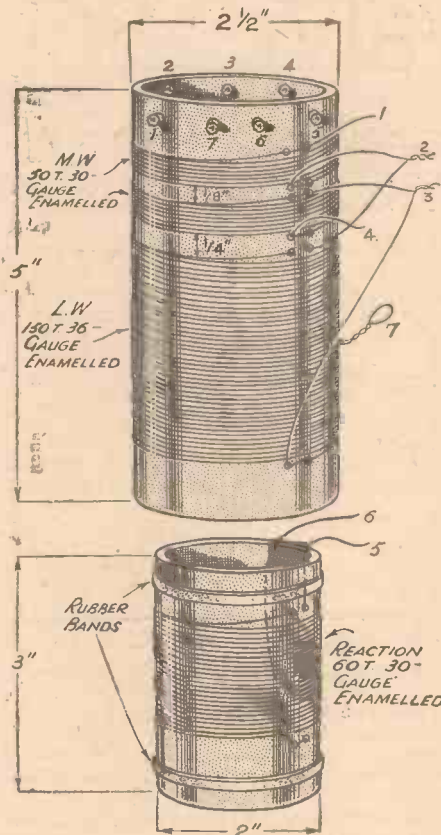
Coil details. The smaller former fits inside the larger one.
